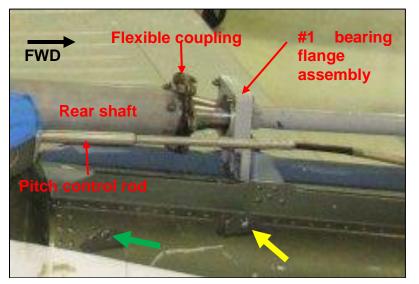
The #1 bearing flange assembly on the training EC-130B4 and indicated by the red arrow in Figure 14.
